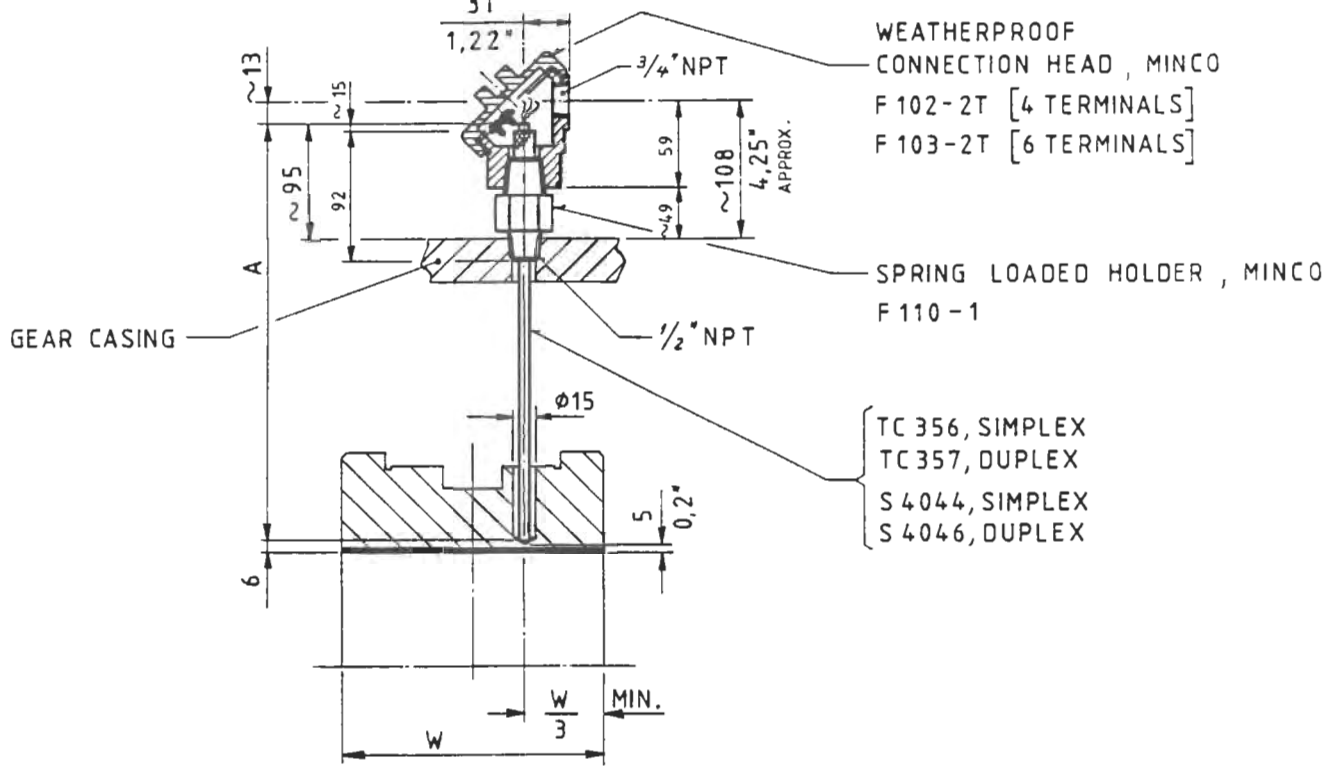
Technical details of instruments for radial bearings mounted from outside of the casing
